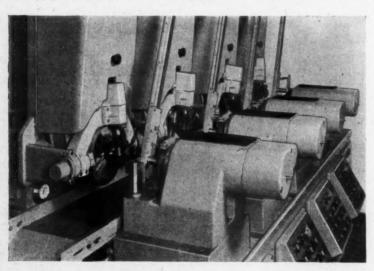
Close-up view of the work-heads on the 4-spindle machine
